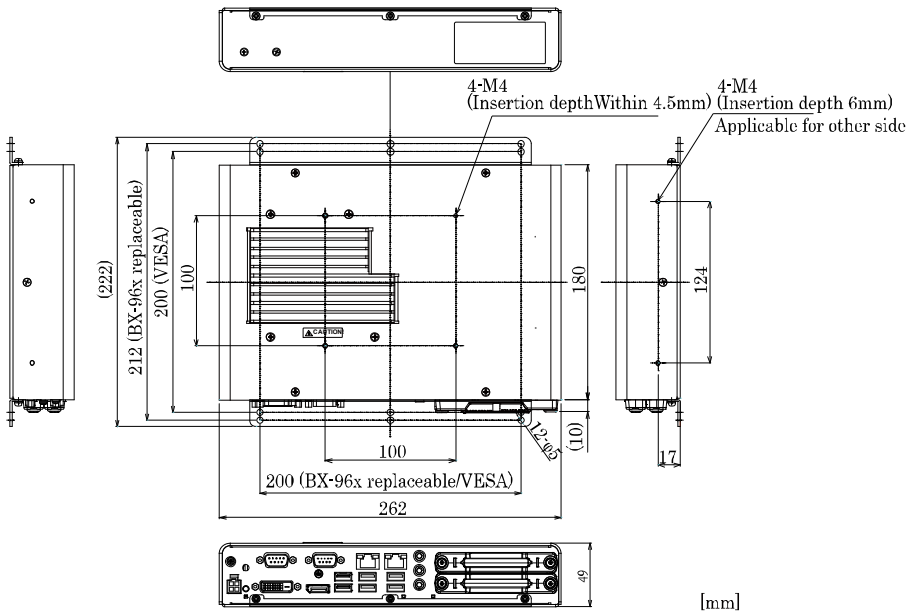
Physical Dimensions (With the bundled attachment fittings)
